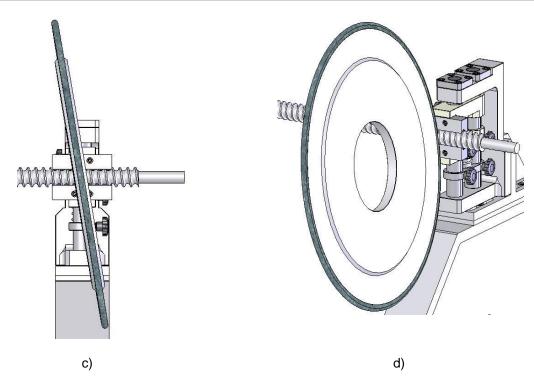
Grinding of a thread profile of a ball screw shaft with a CBN wheel with radial profile
